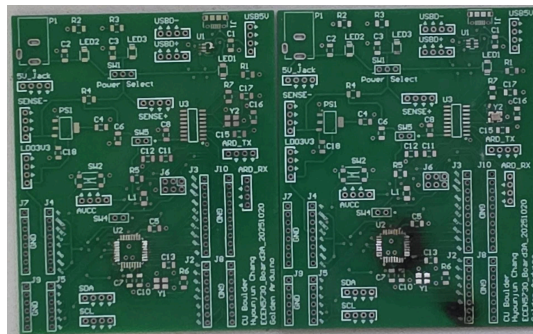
Damaged boards during assembly (Left: Falling out Solder Mask, Right: Burnt Board)
